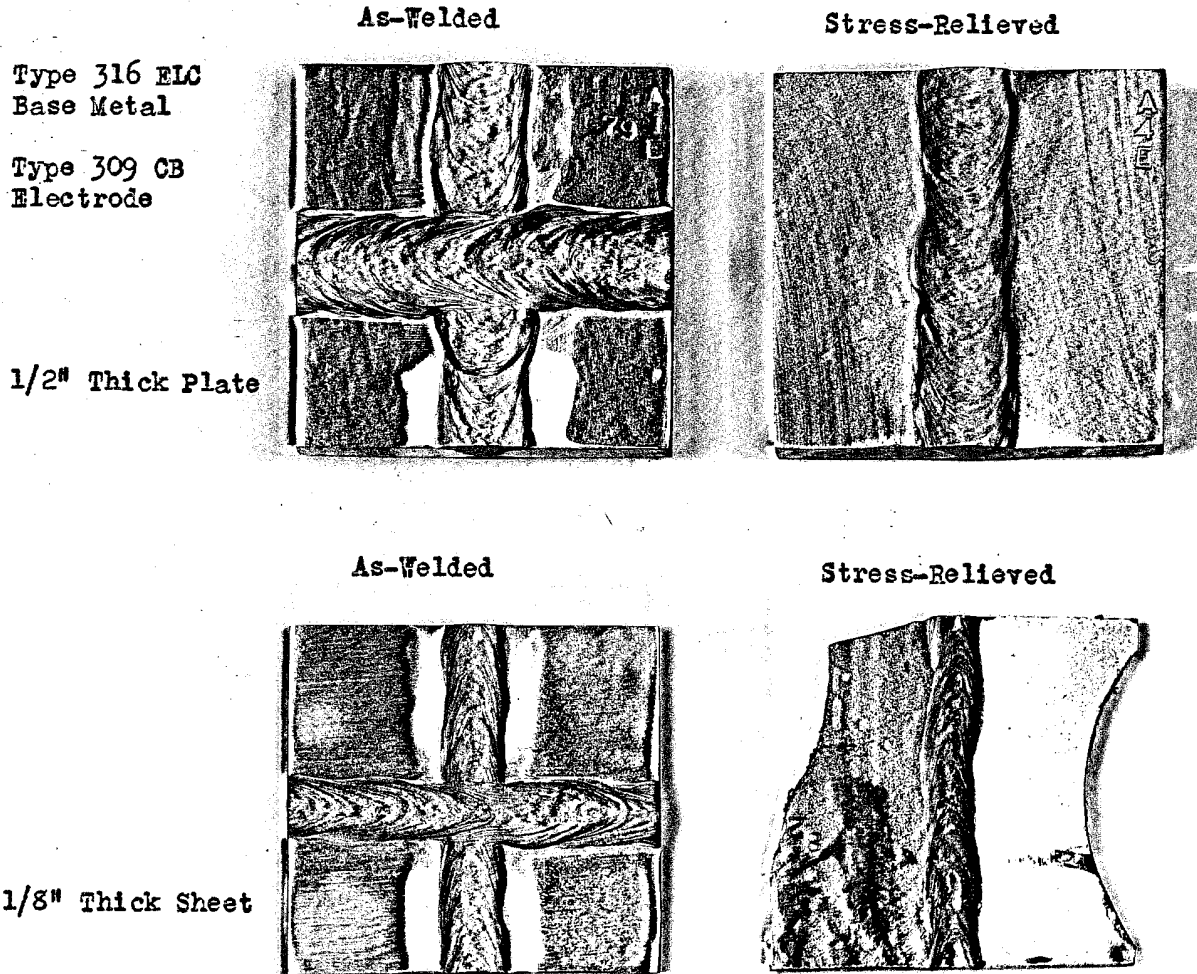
Appearance of Nitric-Hydrofluoric Acid Etch Test Specimens. Type 316 ELC Base Metal Welded with Type 309 Cb Electrodes. Full Size.
